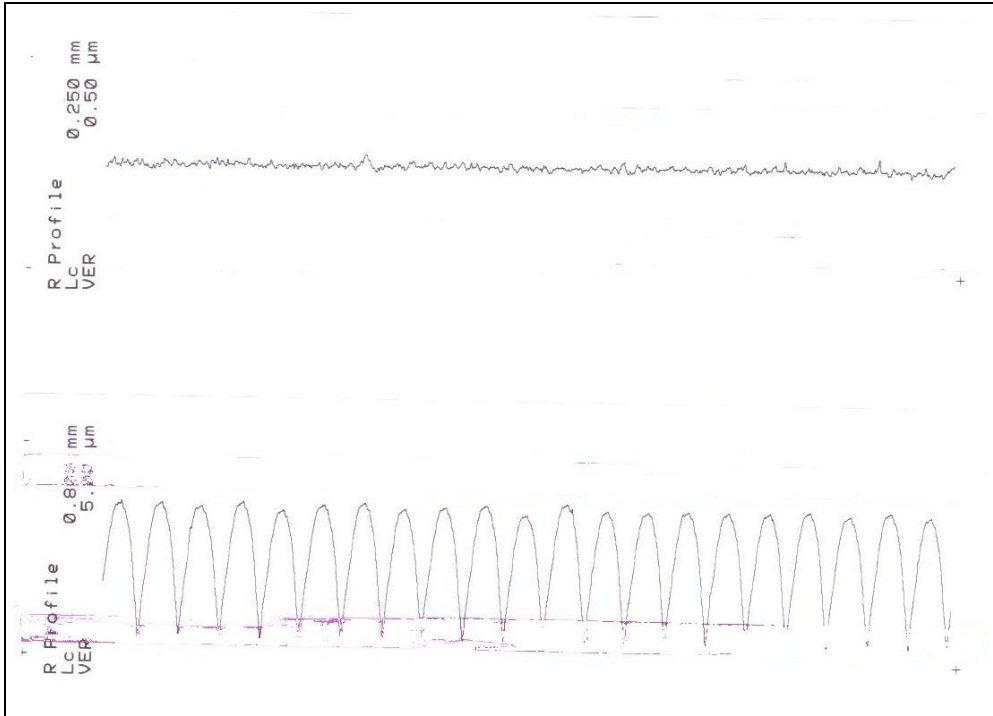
Surface profiles of turned (below) and ultra burnished (above) aluminium surfaces.
